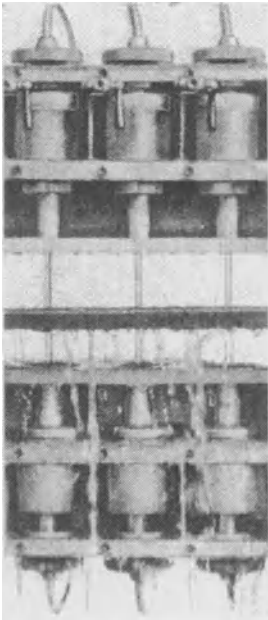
Section of an installation for testing heavy plate, using free water jets (Krautkrämer)
